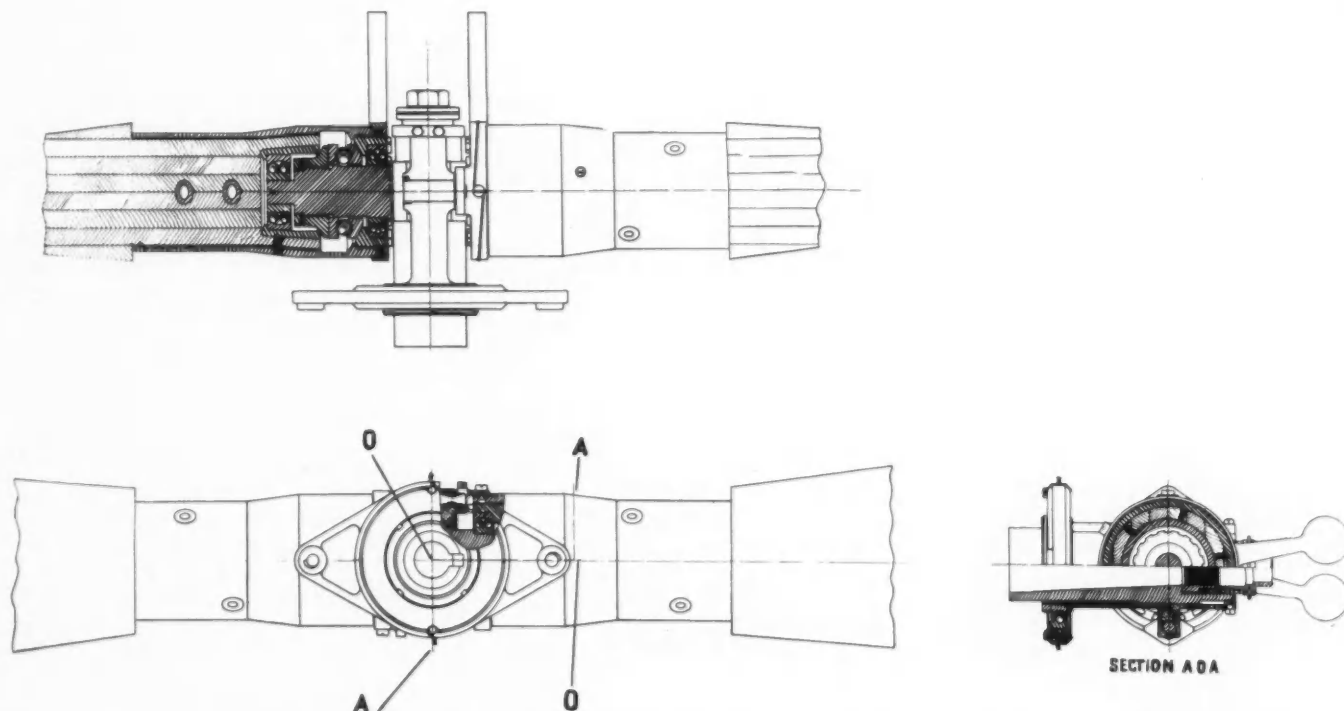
Controllable-Pitch Propeller with Wooden Blades Built During 1920 for the Wright 300-Hp. Engine
